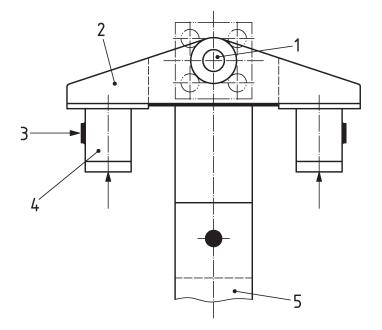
Example of cross-tension test specimen in welding jig
